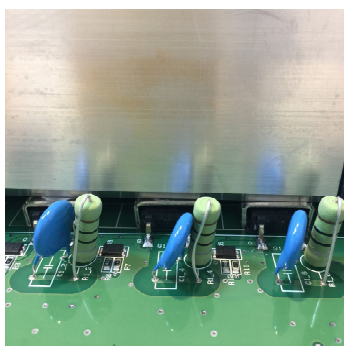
Mounting of surface mounted heat sink for TO - 268 package.
